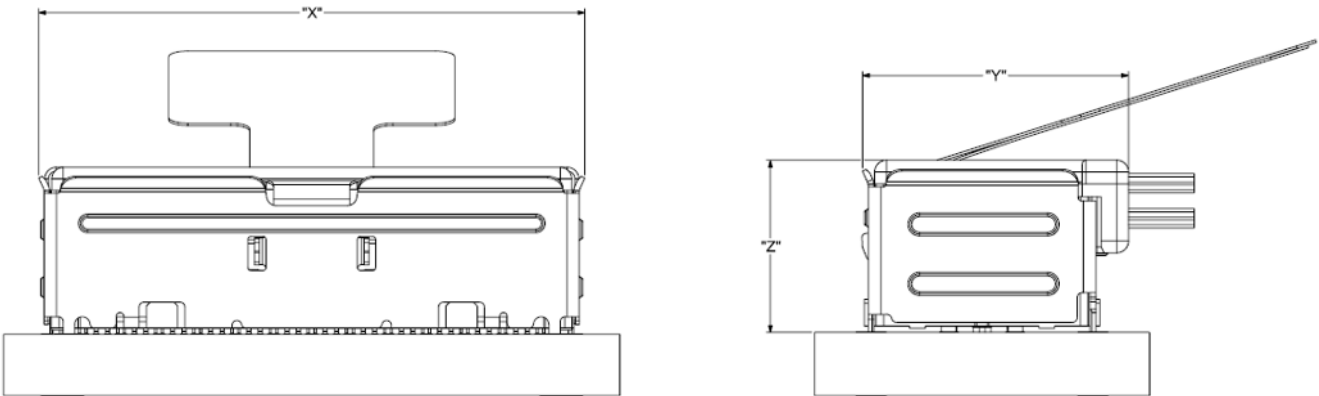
Overall dimensions for Connector/Cable Configurations
